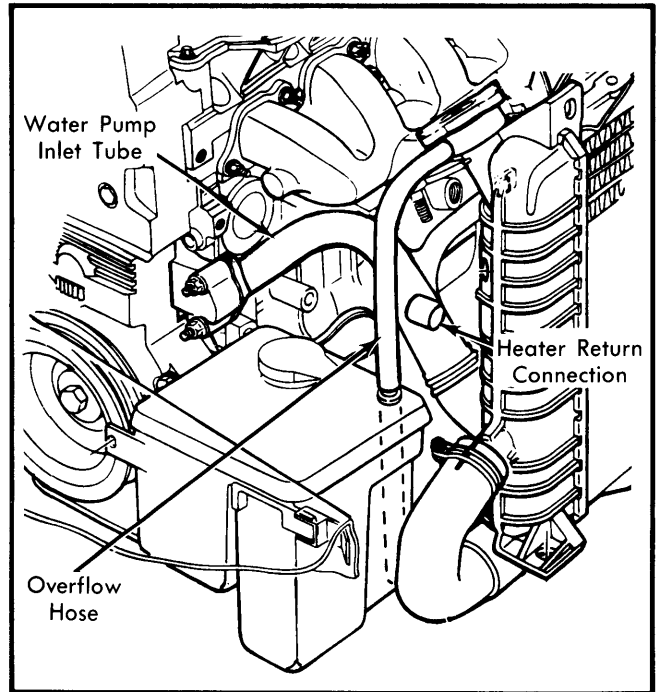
Heater Tube-to-Water Pump Inlet Tube Connecting Point
